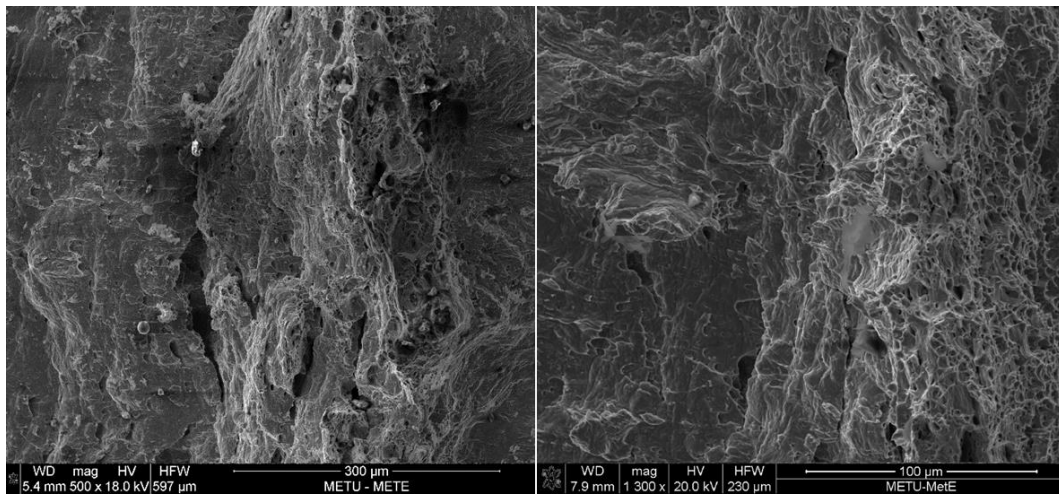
Fracture surface of SENB specimens sectioned from specimens built under Ar+O₂ (left) and Ar+N₂ (right).
